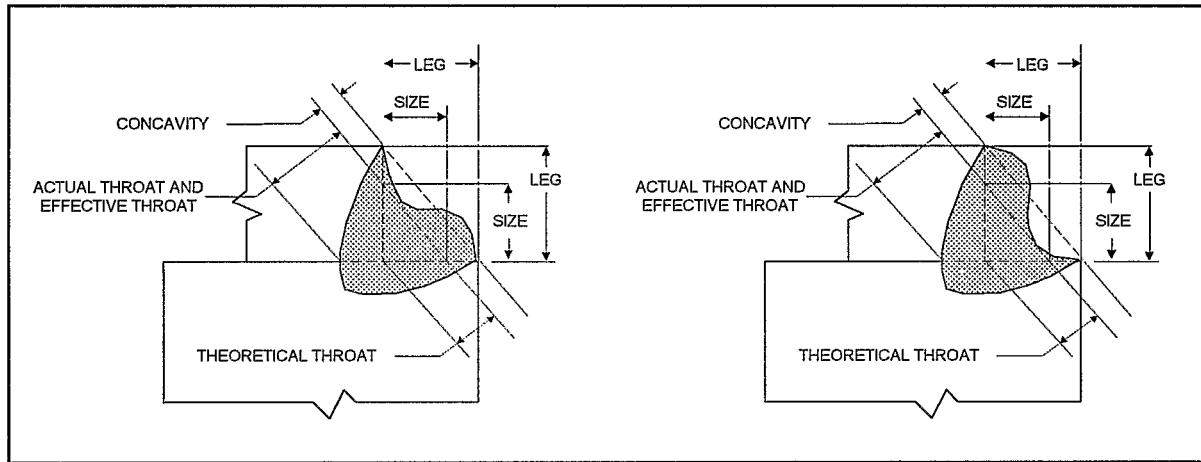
Typical Grumman End Volume Weld Profiles
